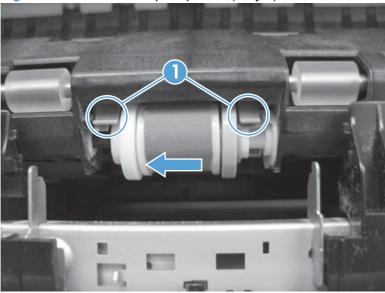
Remove the separation roller assembly (Tray 2) (2 of 2)
